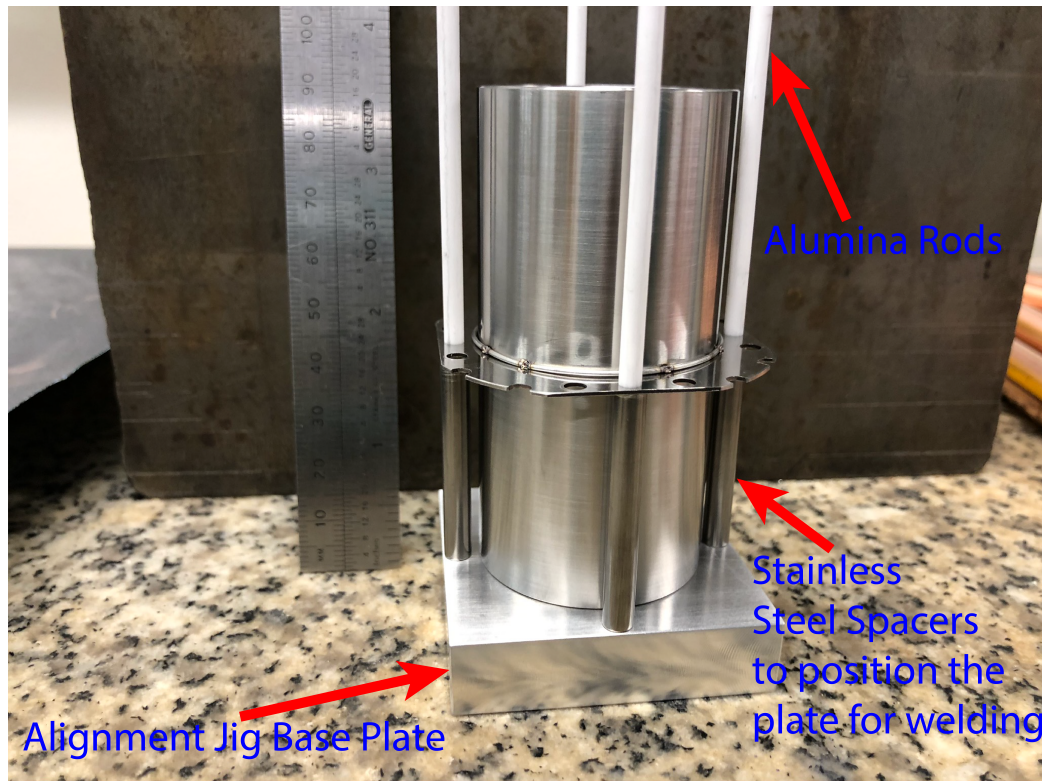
Picture of the assembly of the Einzel lens alignment jig with one of the outer Einzel lens electrode inserted into the jig. There are 4 holes in jig's base plate to allow the insertion of four alumina rods.
